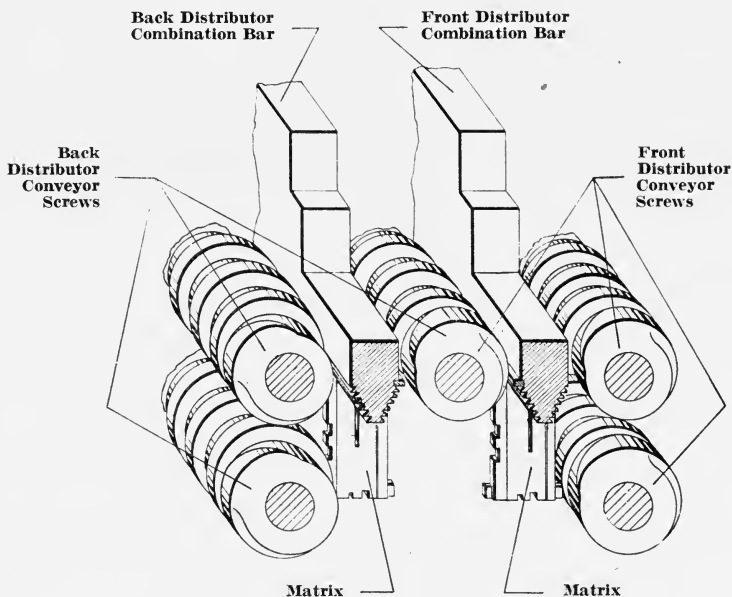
Mixer Distributor Conveyor Screws, shown in perspective view. The distributor bars with a matrix hanging upon each bar and the lugs of the matrices in engagement with the threads of the conveyor screws are also shown.
